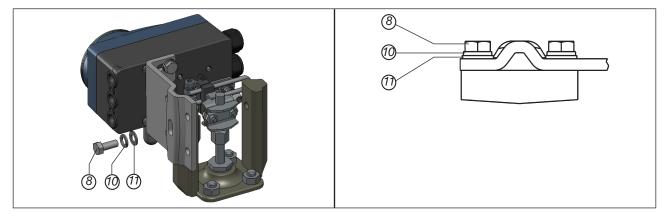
Attaching the positioner with the mounting bracket; for actuators with a cast frame
